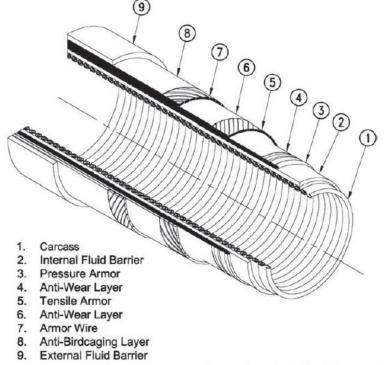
Typical Cross Section of an Unbonded Flexible Pipe [29]
